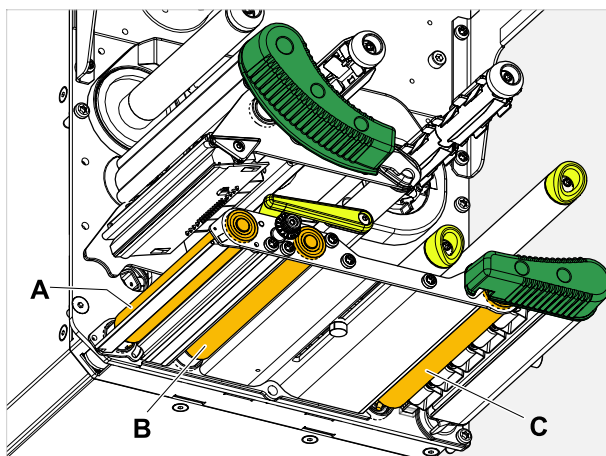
A Print roller, B Feed roller, C Draw roller (only at XDM 94x)
